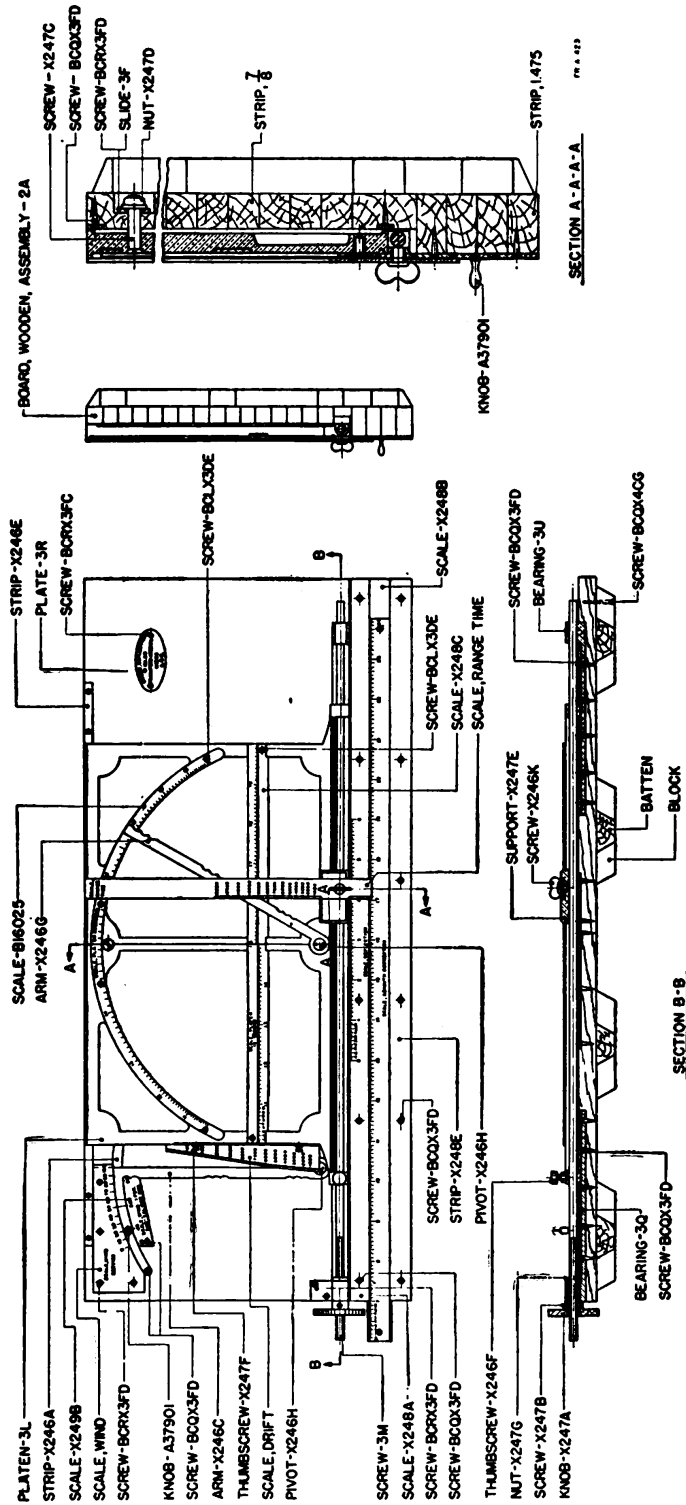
Gun deflection board M1905—assembled and sectioned views.
